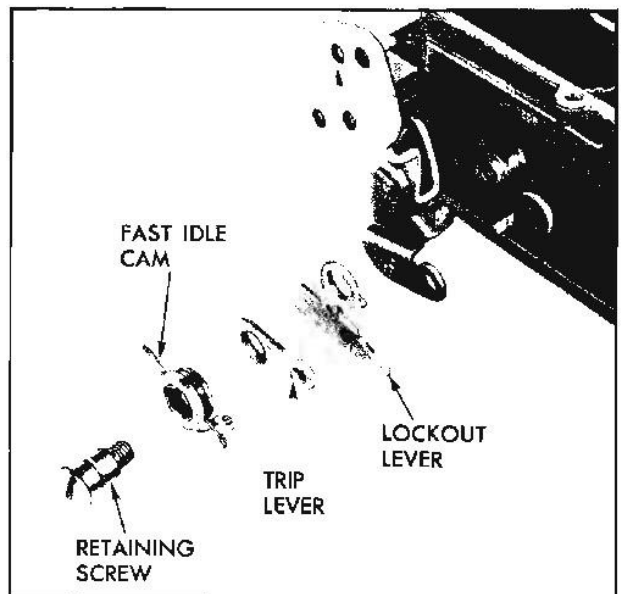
B-92 Lockout Lever and Fast Idle Cam
